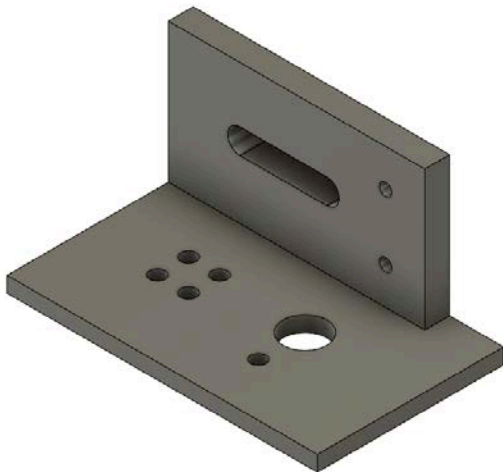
two sheet metal components welded together. This can be 'copied' to AM but there is a concentrated point of failure at the joint.
